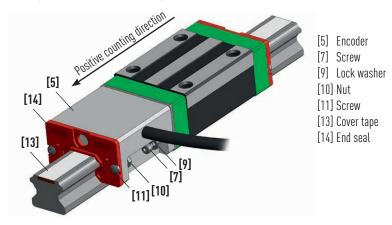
MAGIC-PG encoder, pre-assembled at the block
